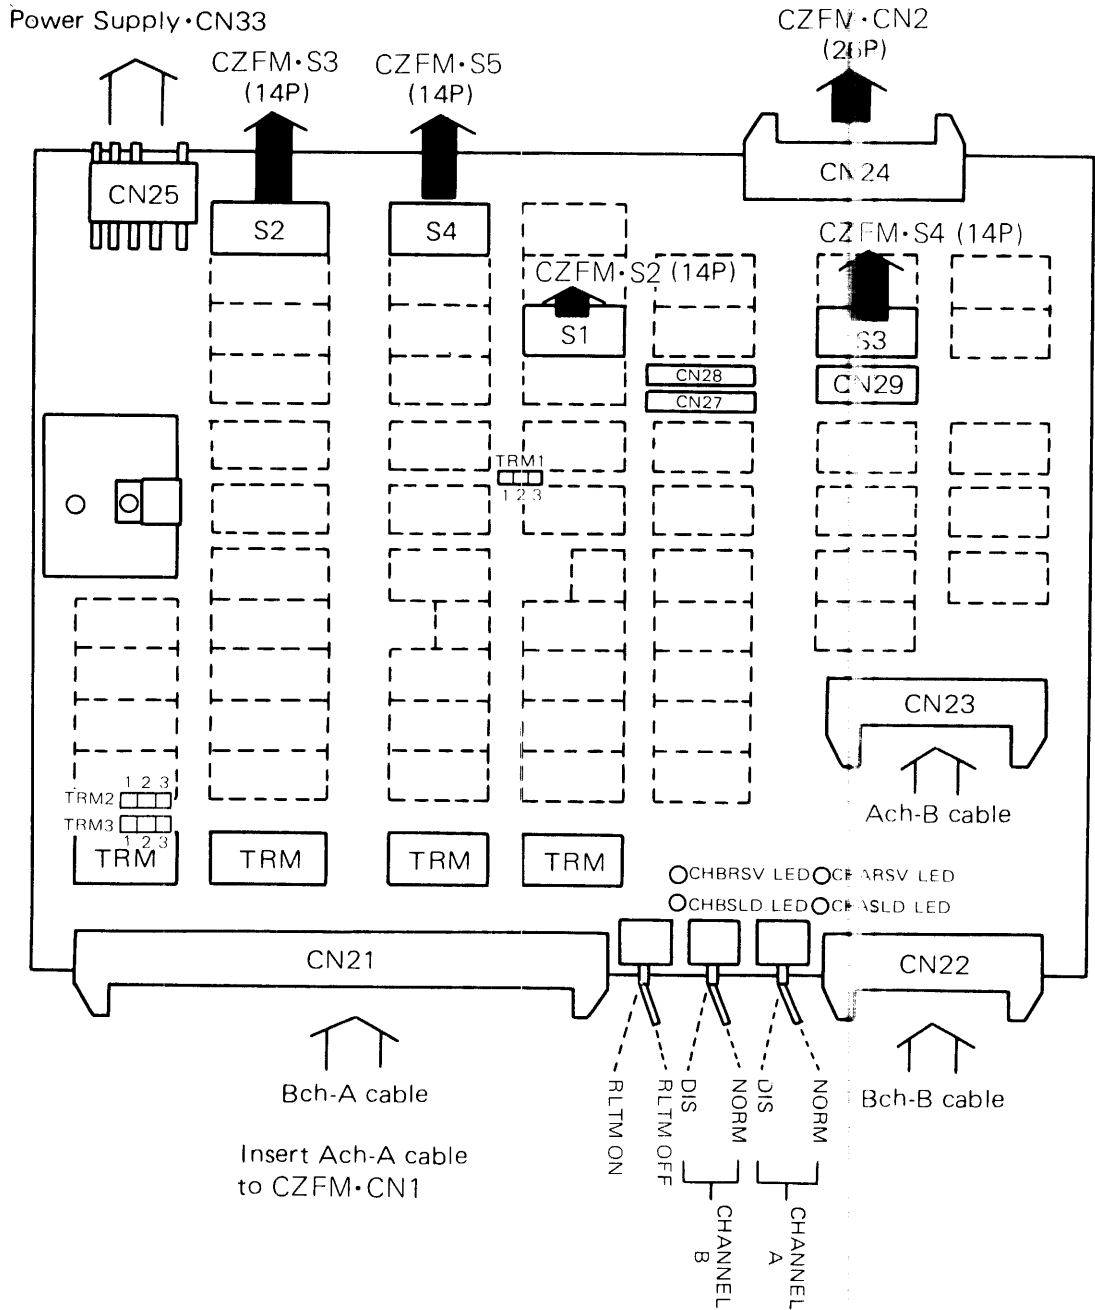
Dual Channel PCB Assembly Connector Location
